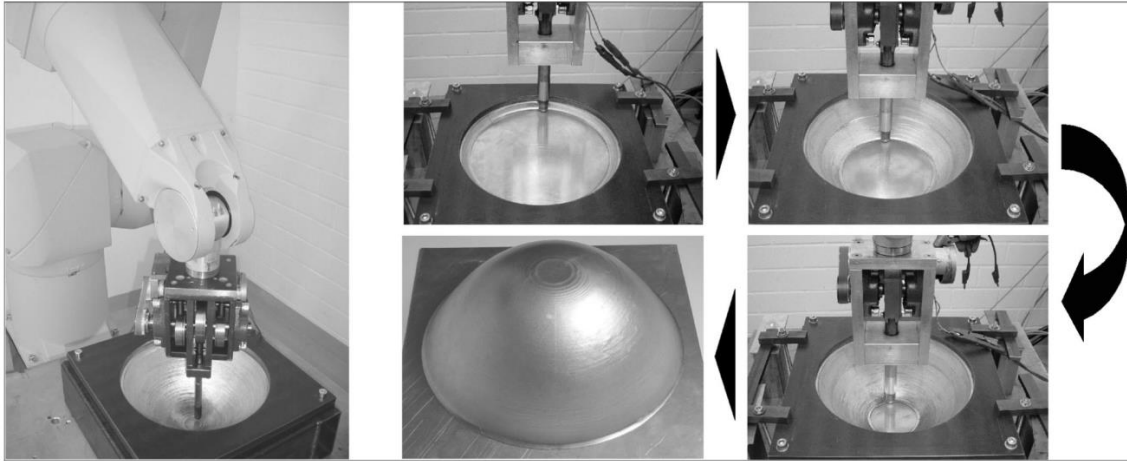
Robot cell for incremental forming of aluminum metal sheet (Schafer and Schraft, 2005).
